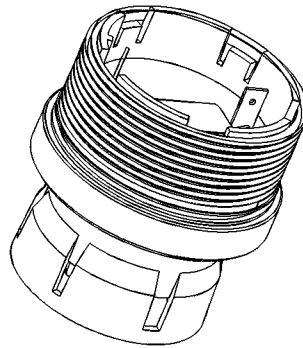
Sensor Assembly and Sensor Guard for General-Purpose Model
